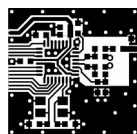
PCB layout example for 433 MHz operation on nRF905, single ended connection to 50Ω antenna by using a differential to single ended matching network
